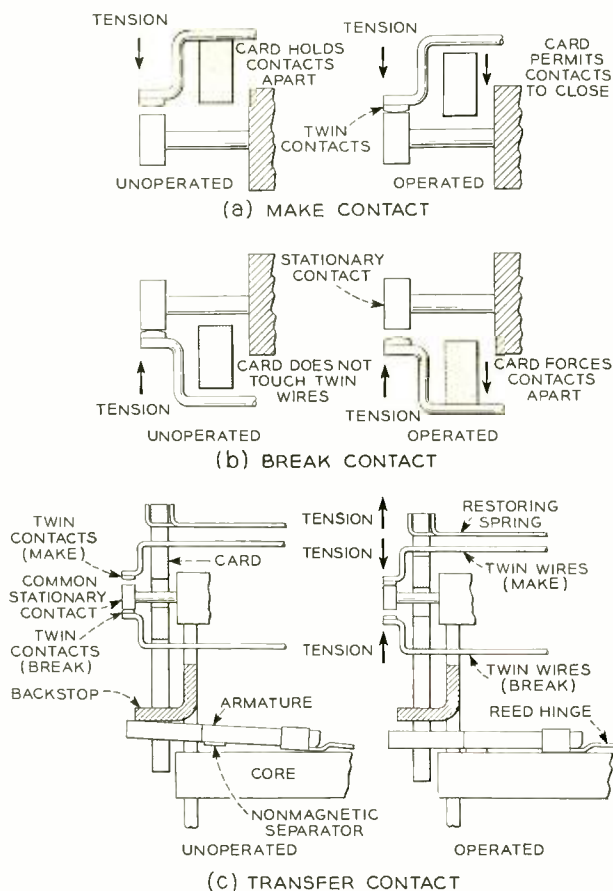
Principle of operation of (a) make contacts, (b) break contacts and (c) transfer contacts.
